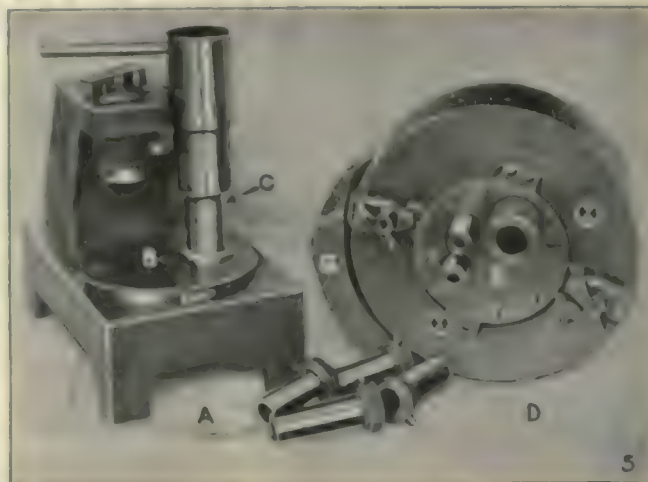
DRILLING FIELD CASES. FIG. 5—FIXTURES FOR BORING GEAR CASES
